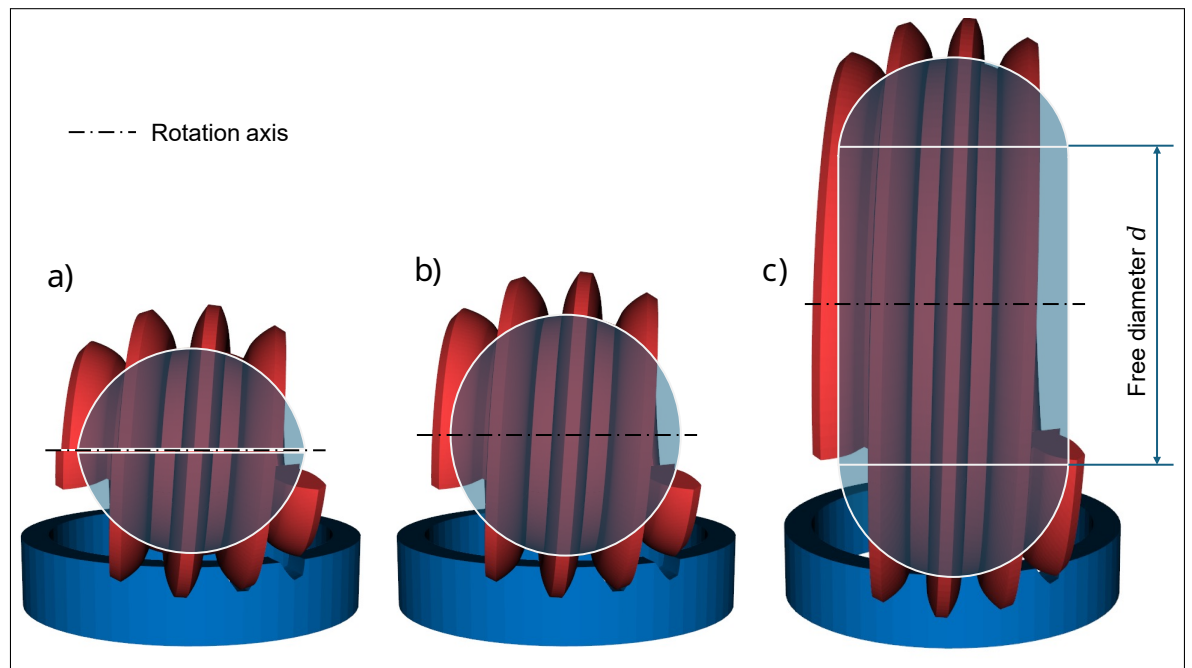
Types of tool geometries, showing a barrel-shaped (a), spherical (b) and torus-shaped tool (c) from left to right. Inspired by [16].
